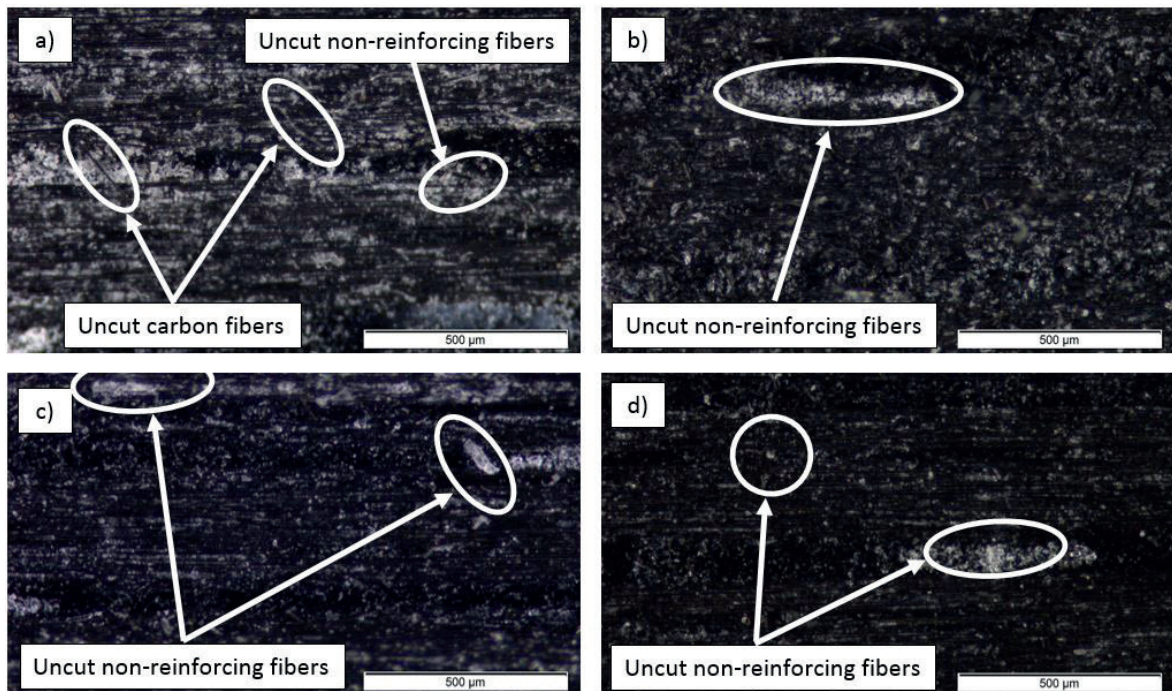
Images of milled surfaces of UD-CFRP, captured by a Dino-Lite AM4013MT digital microscope: (a) Tool B (b) Tool E (c) Tool C and (d) Tool D
